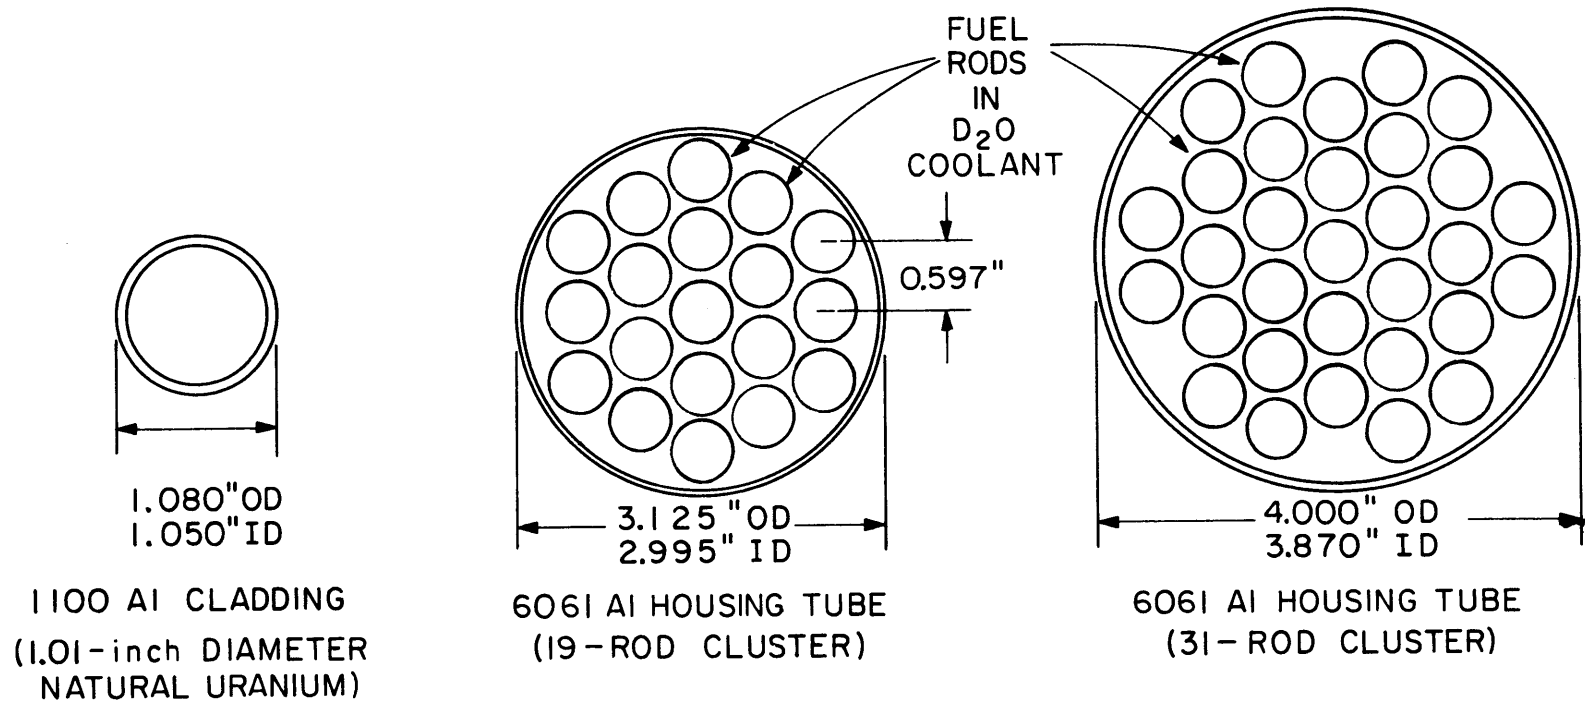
FUEL ELEMENT ARRANGEMENTS
